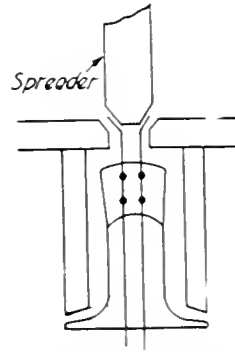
Leading-in Wires Being Shaped Ready for Attachment to Filament
